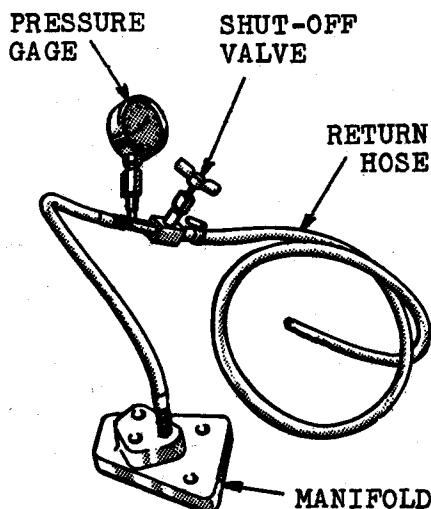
With manifold on top of pump adapter plate modified as shown in Fig. 206, connect pressure gage and shut-off valve hose to manifold and insert return hose through filler plug opening in lift cover.
